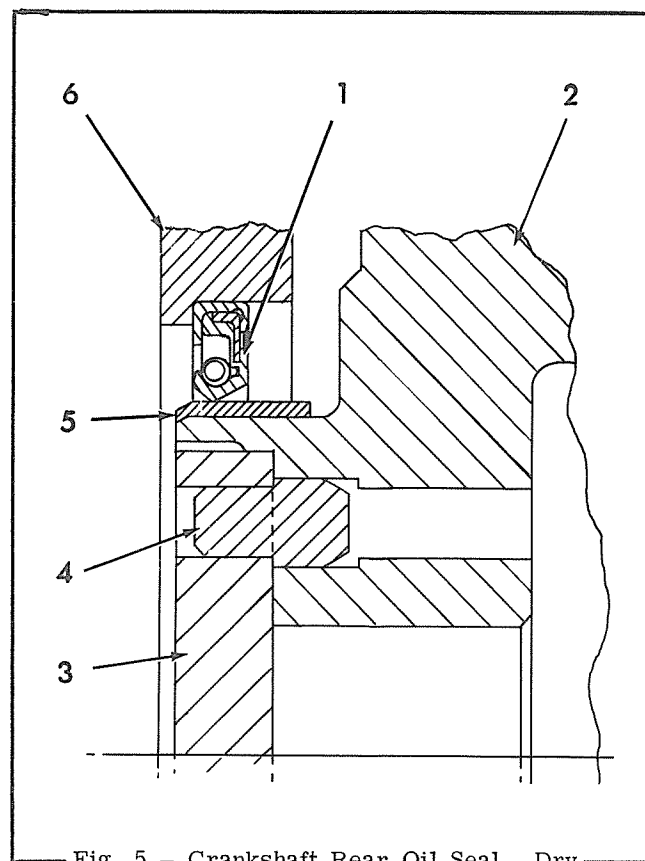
Crankshaft Rear Oil Seal - Dry
